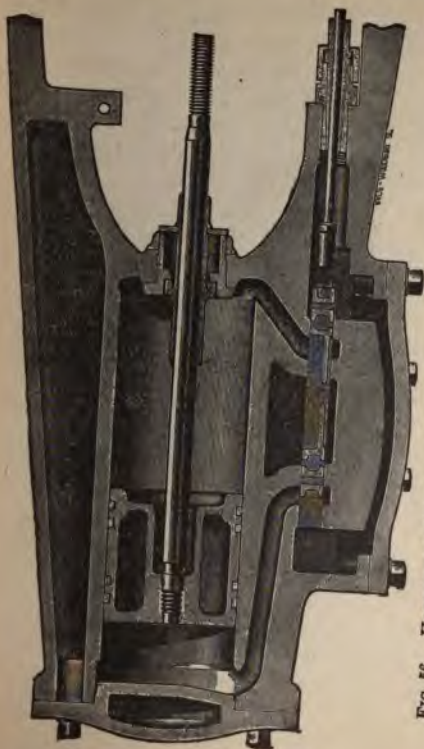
HORIZONTAL SECTION THROUGH CYLINDER, STRAIGHT-LINE ENGINE.
